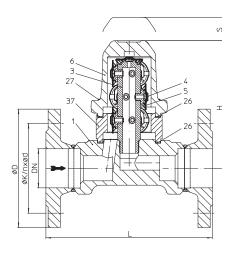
1....10K2 (DN40-50) with 10 capsules, with flanges
